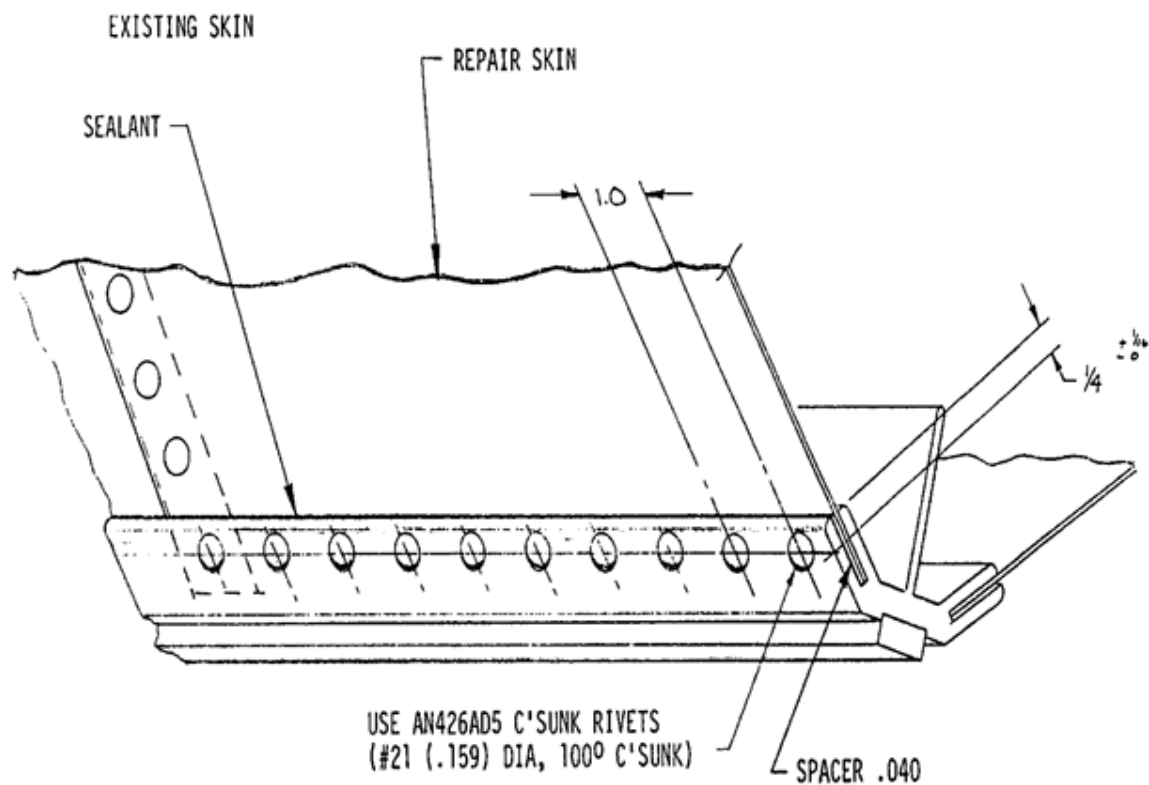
B: MODEL 3730/3900/4000/6000/6100/8000 TYPICAL REPAIR BOTTOM SKIN TO KEEL INSTRUCTIONS
